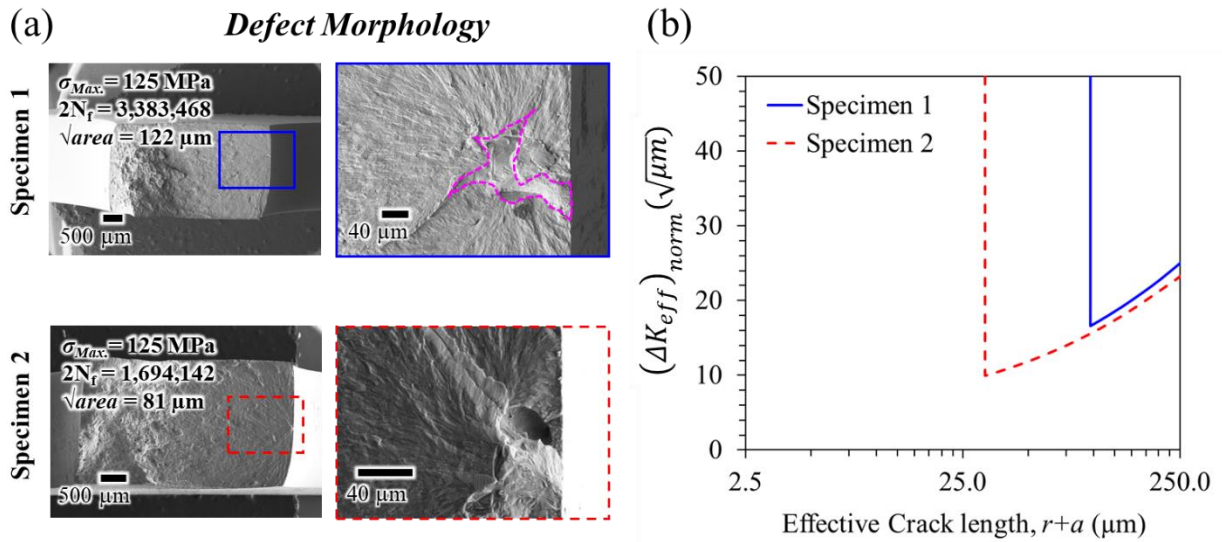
(a) Fractography images and (b) effective SIF of cracks ahead of the critical defect in Specimens 1 and 2.
